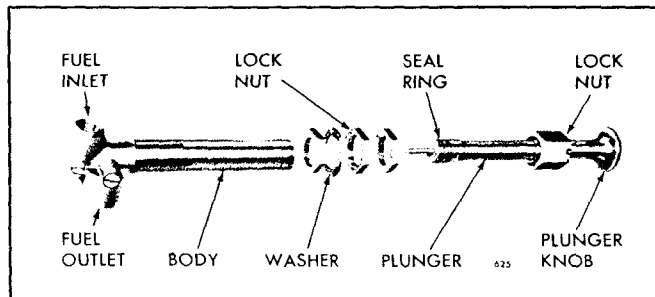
Fuel System Priming Pump and Relative Location of Parts
